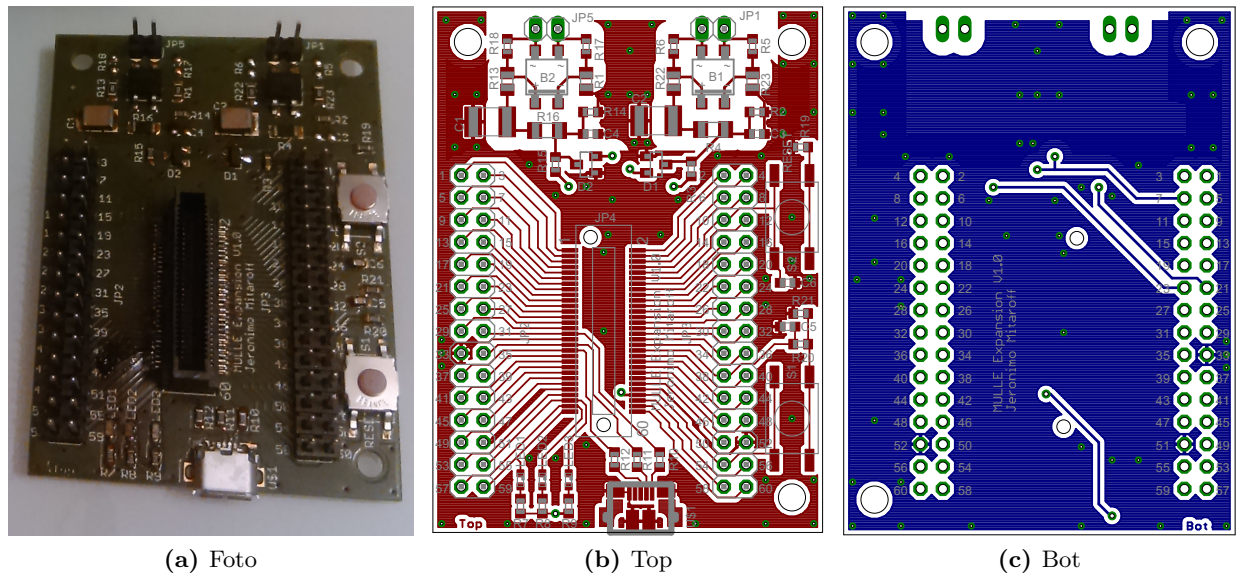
MULLE extension board after assembly (a), Layout top (b) and bottom (c)
